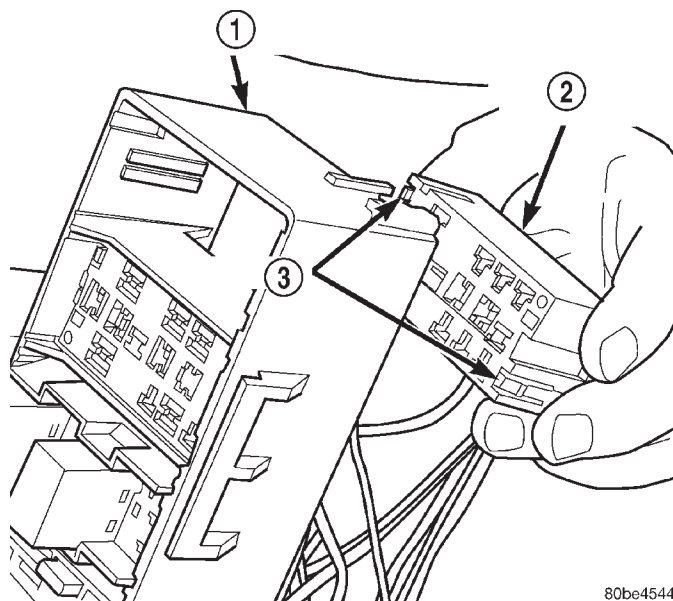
PDC Relay Cassette Remove/Install - Typical
